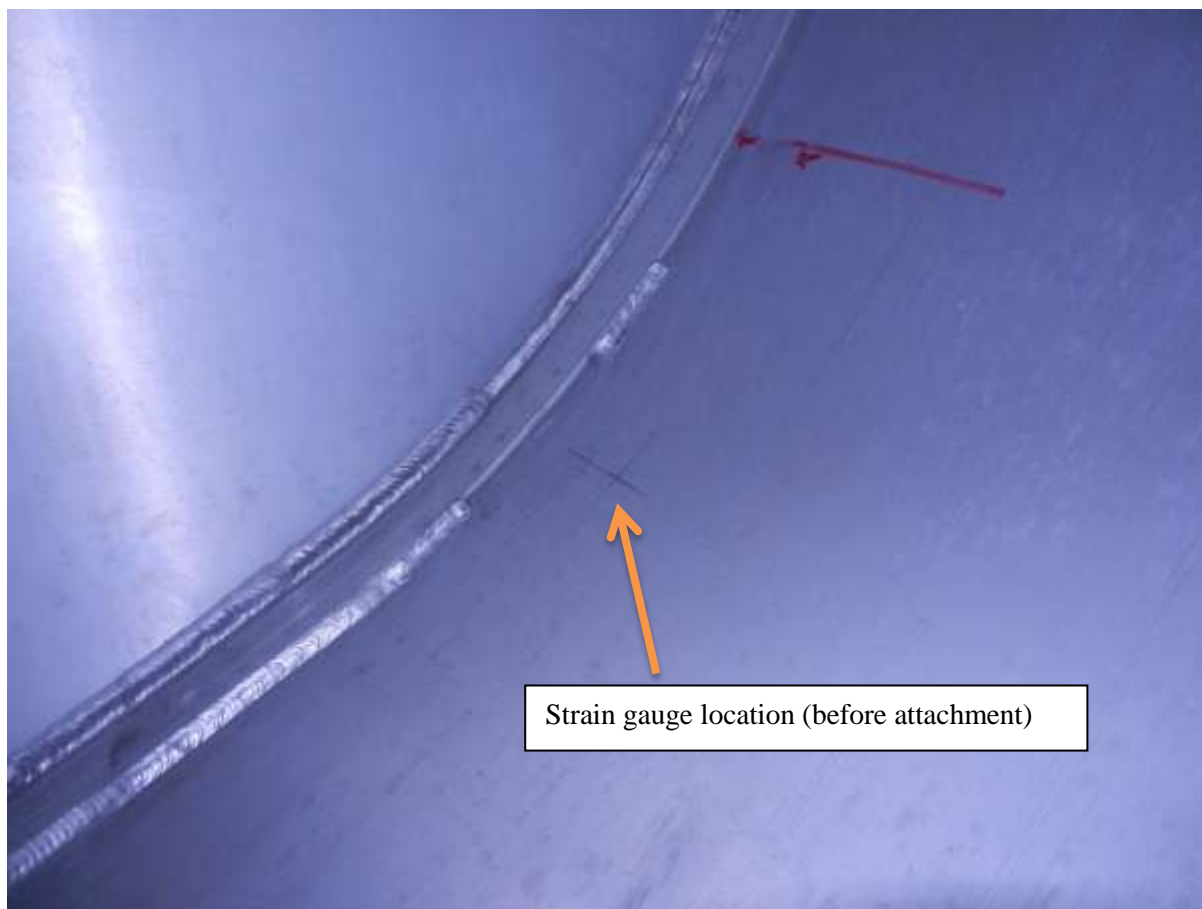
Strain gauge location near to welds (GRW tanker J3910, Band B)
